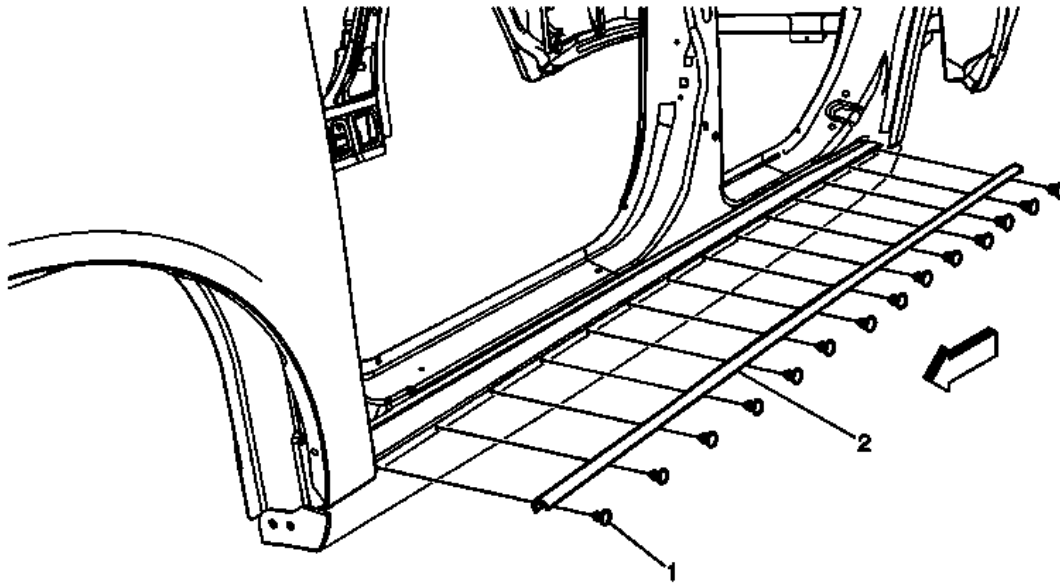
Identifying Front or Rear Side Door Lower Weatherstrip Components
